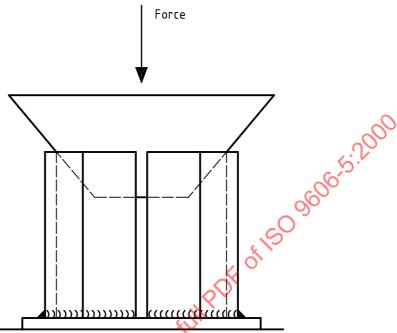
Preparation and fracture testing of test specimens for fillet welds on pipe
